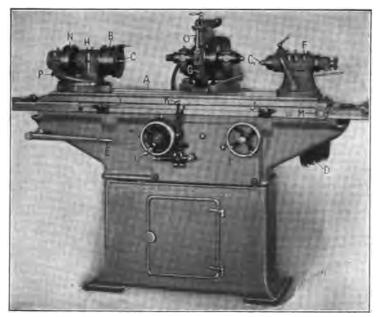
Brown & Sharpe Universal Cylindrical Grinding Machine
